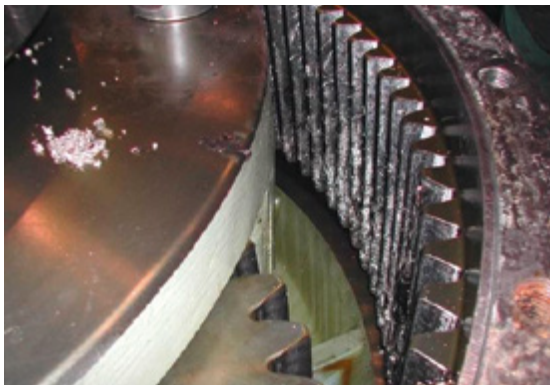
Transmission damage at the planetary stage due to bearing failure after approximately 30,000 operating hours (1.5 MW wind turbine); source: R+V
